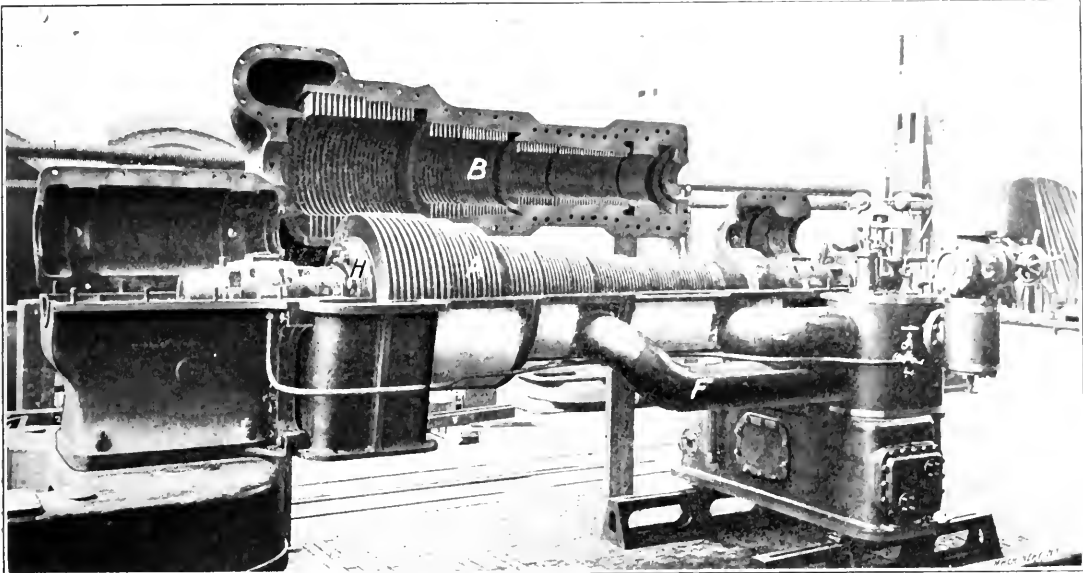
One thousand H. P. Willans-Parsons Turbine.
